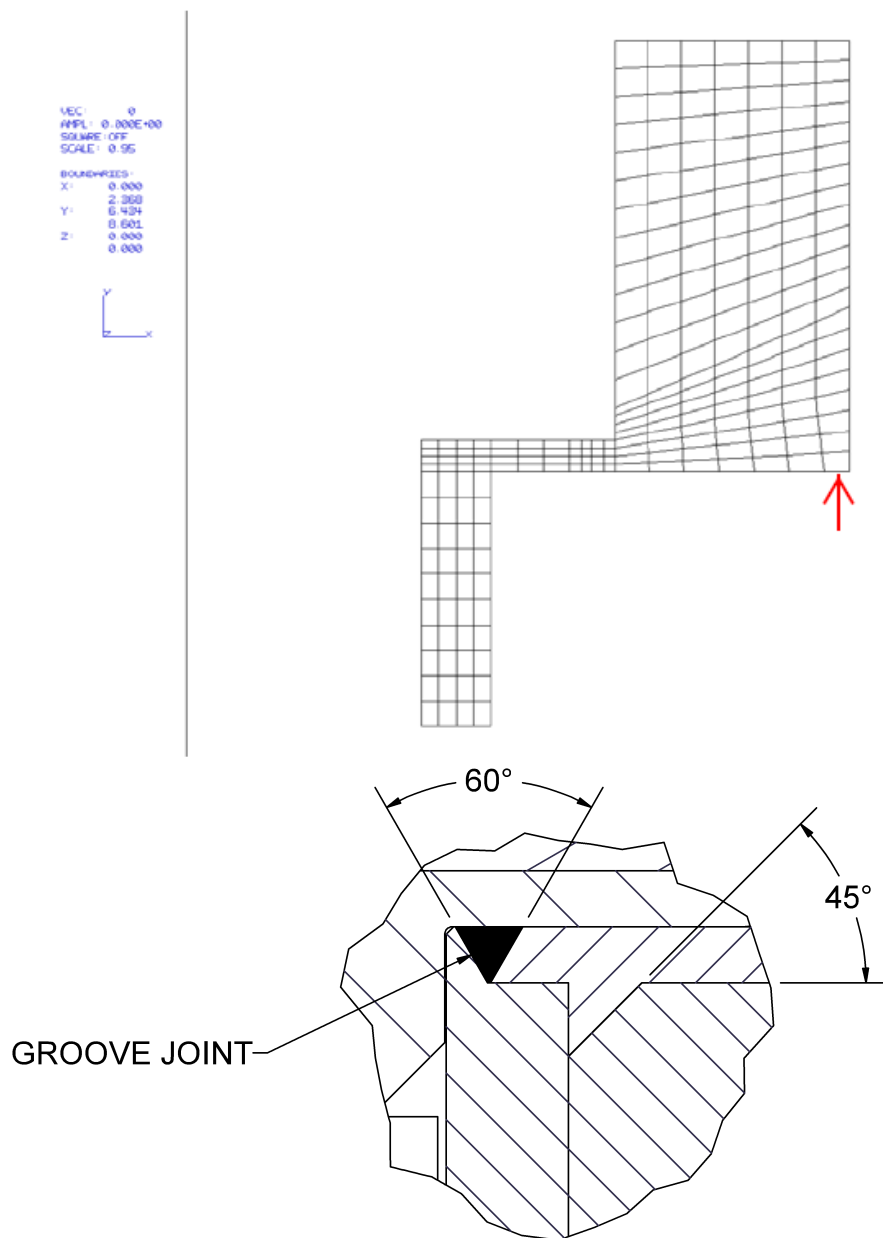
Typical Corner Cask Cavity Shell Weld Joint Configuration – All Models
